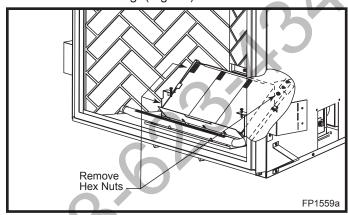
Use 3/8" socket to remove hex nuts holding left burner leg.
